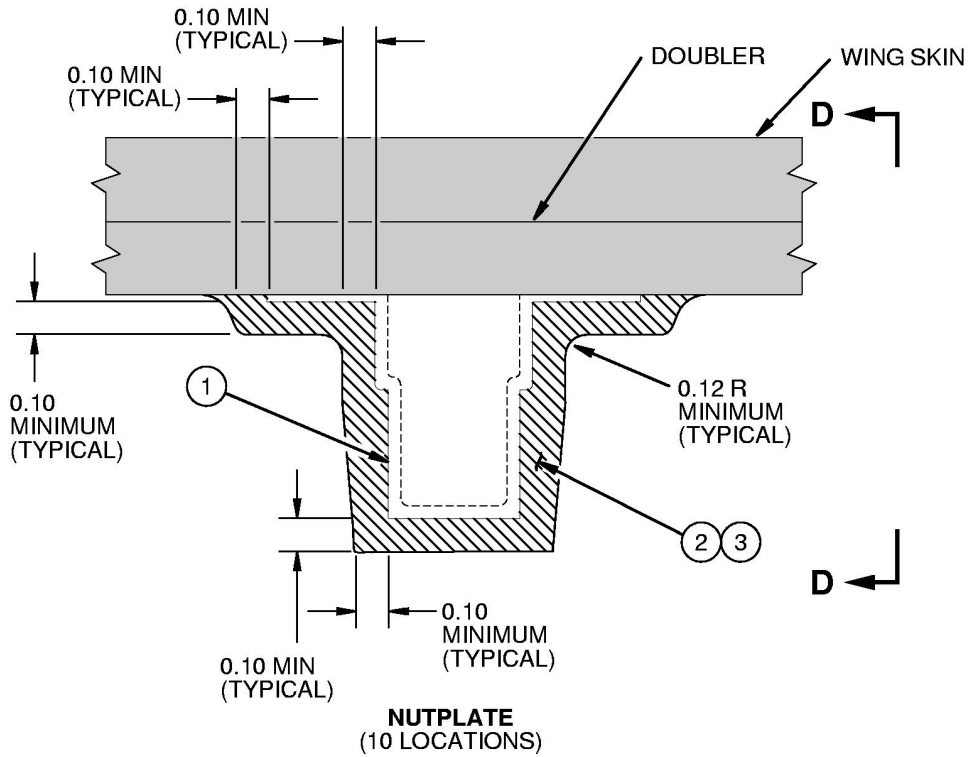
RIGHT WING - DOUBLER - CAP SEAL NUTPLATES
